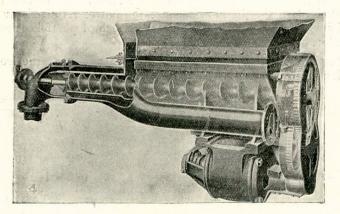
Section through Lopulco Feeder of Screw Type, showing Motor Drive and the Pipe for Supplying Carrying Air.
